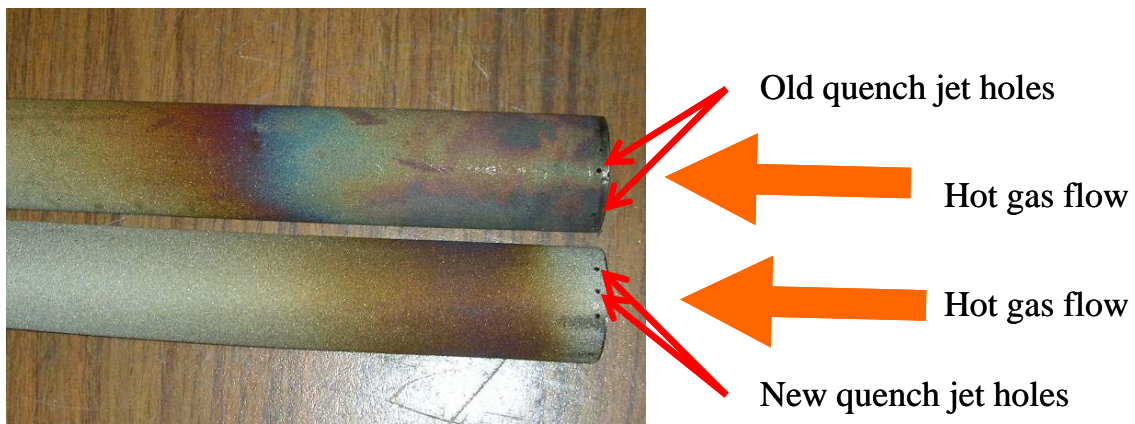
Heat damage to sintered steel tubes: old tube (top) and new tube with more large holes (bottom).
